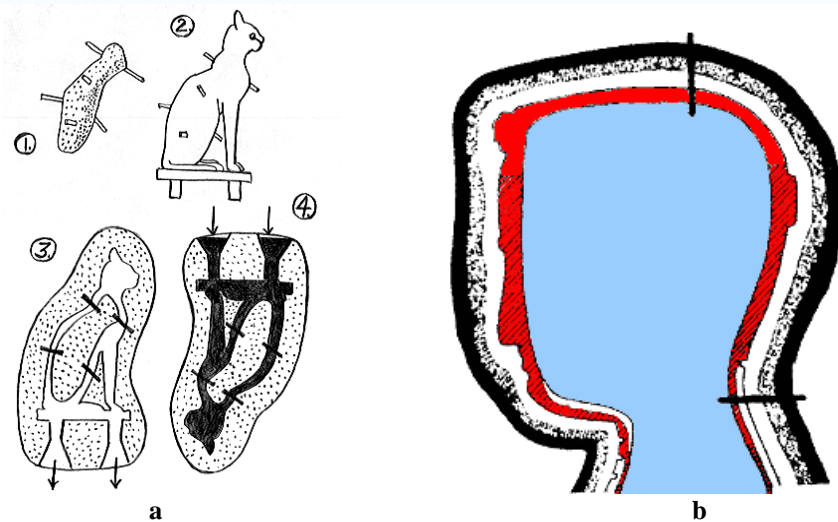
a) Lost-wax hollow-casting shows (1) core piece, (2) wax mold of cat, (3) cross section of core, wax cat and clay mantle, (4) inverted assembly ready to receive molten bronze [30]; b) A cross section through a Buddha head during production. The wax image (red) was modeled over an inner clay core (blue). Metal pins hold the core and outer clay casing apart [31].
